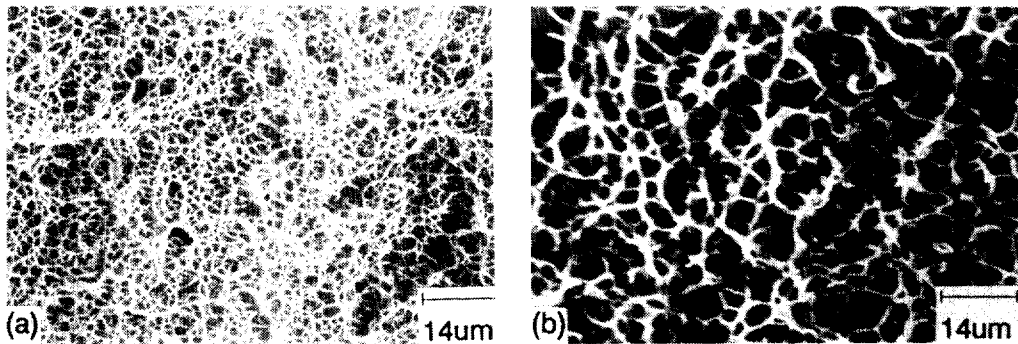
SEM fractography observed from weld metals fractured in air. (a) GMAW weld metal, (b) SMAW weld metal.
